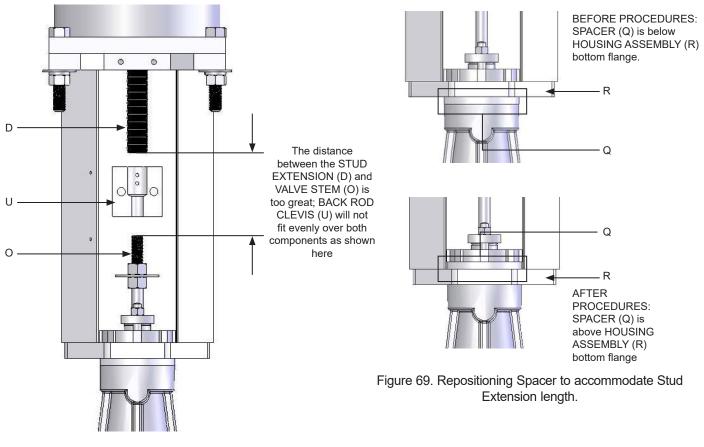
Example of how Valve Stem fluctuation can prevent further continuation of complete assembly (Rod Clevis cut-away to show inside hole depths)
